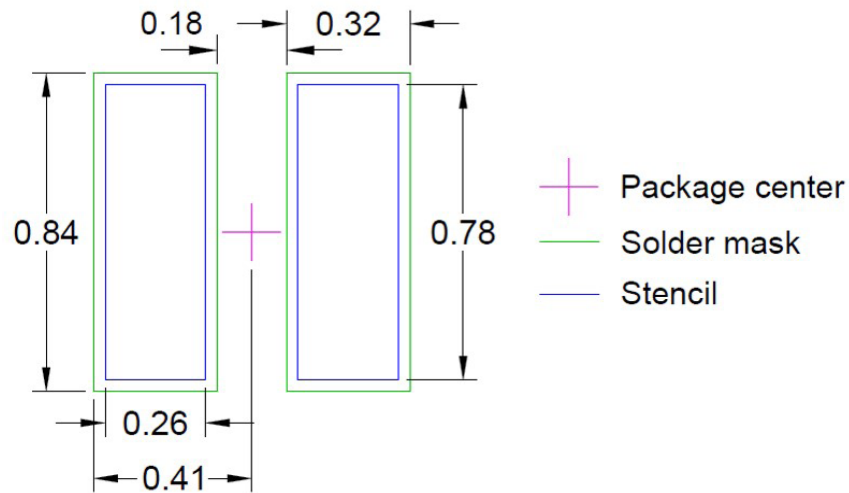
Recommended PCB solder pad layout for LUXEON HL1Z Color Line
